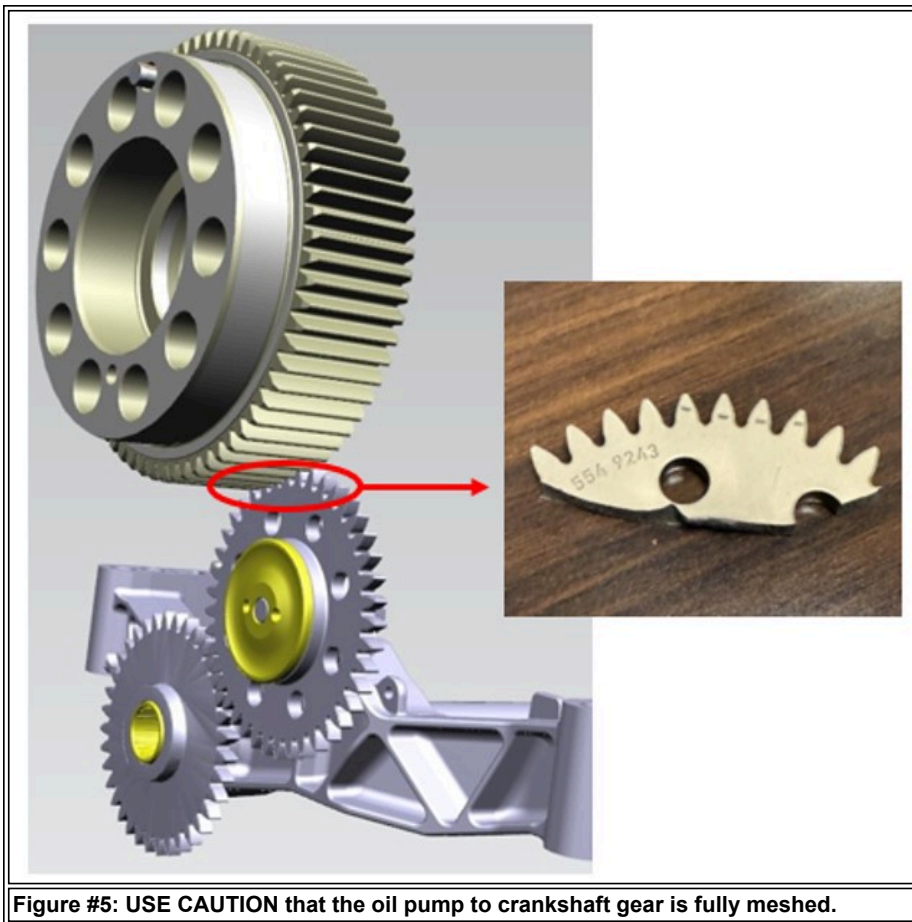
USE CAUTION that the oil pump to crankshaft gear is fully meshed.
